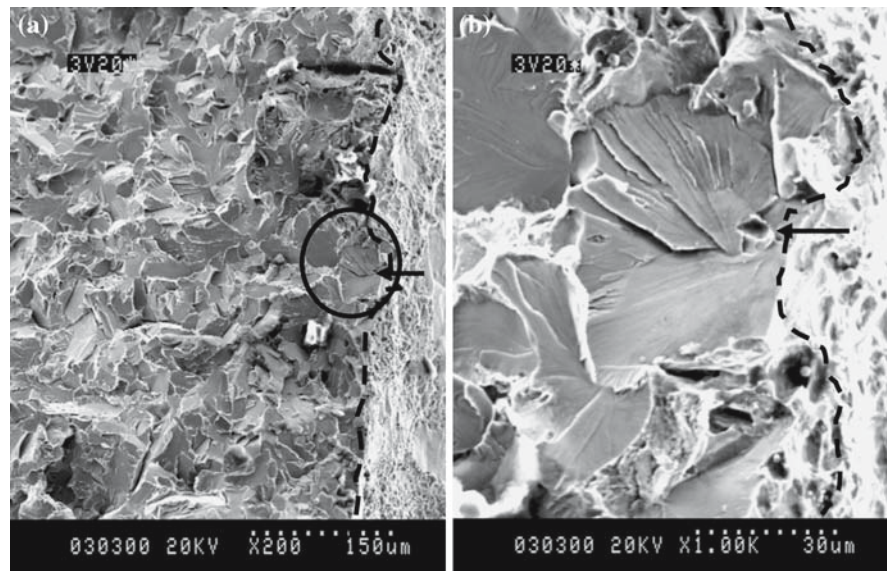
Typical fracture surface showing cleavage initiated at a distances X_f ahead of notch root (a) for a 3I specimen at a loading rate of $V = 500$ mm/min, (b) close look
